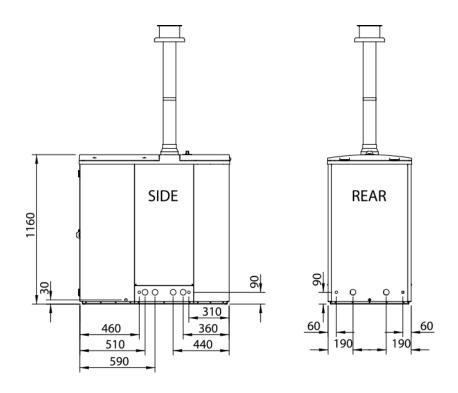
Casing Knock out Positions for Installer Plumbing and Wiring.
